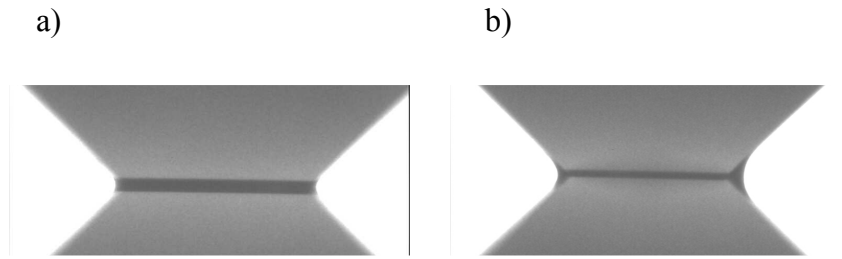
a) x ray picture of a good solder joint b) X-ray picture of a bad solder joint
